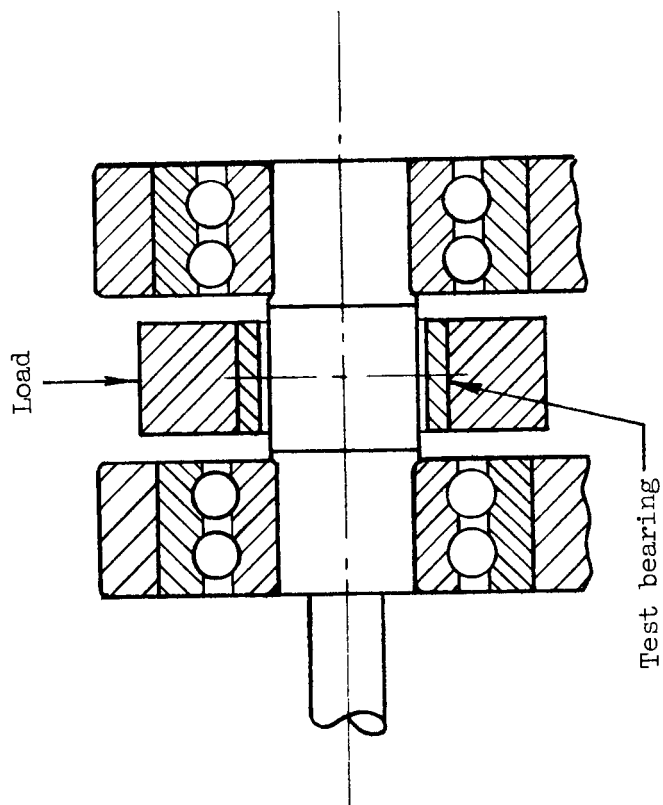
Bearing test arrangement used by Battelle Memorial Institute (refs. 8 and 9) to determine load capacities of central bearings by experiment.
